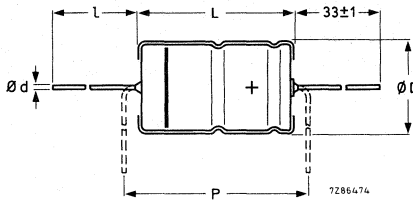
Style 1; see Table 1a for dimensions d, D, L, l and P.
